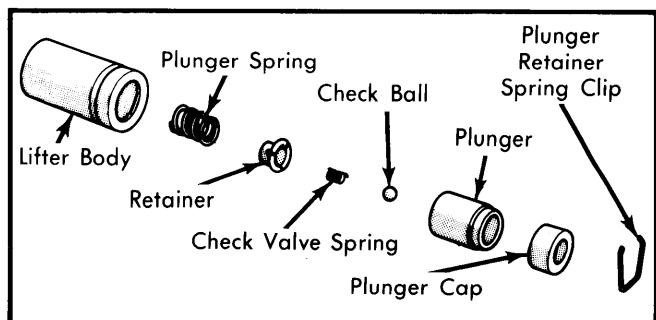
Exploded View of Hydraulic Lifter Assembly
